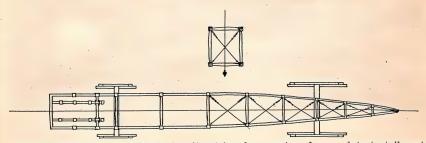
B.—Top view checking struts with string from center of nose plate to tail post.
